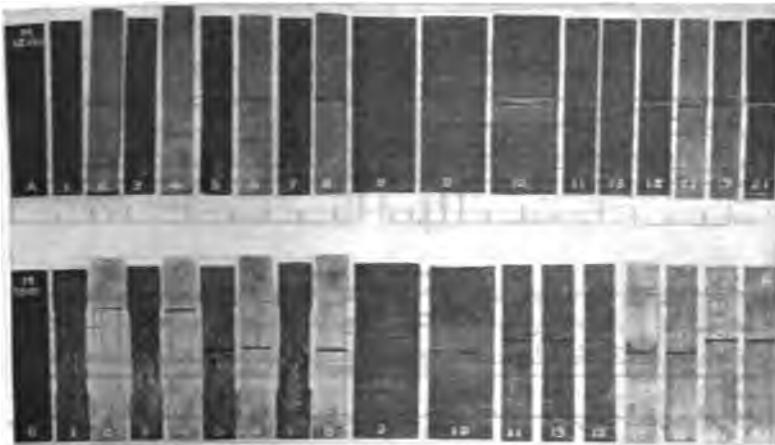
Showing tension and transverse test specimens of A and B section rail 12101 after test. Specimens 1 to 8, inclusive, tension test; specimens 9 to 23, inclusive, transverse test.
